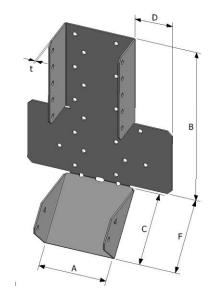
Dimensioned drawings of SPR xx/yyy
